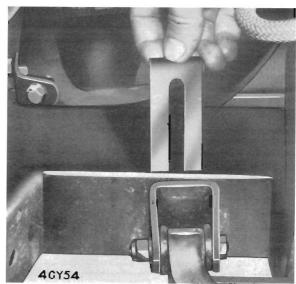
Fitting shims between lower inner fulcrum bracket and chassis frame
